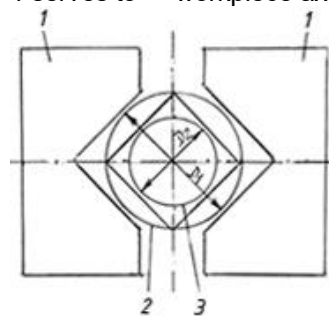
Scheme of centering a workpiece of circular cross-section with diameters  $D_1$  and  $D_2$  using figured sliders: 1 – figured sliders; 2 – workpiece with diameter  $D_1$ ; 3 – workpiece with diameter  $D_2$
